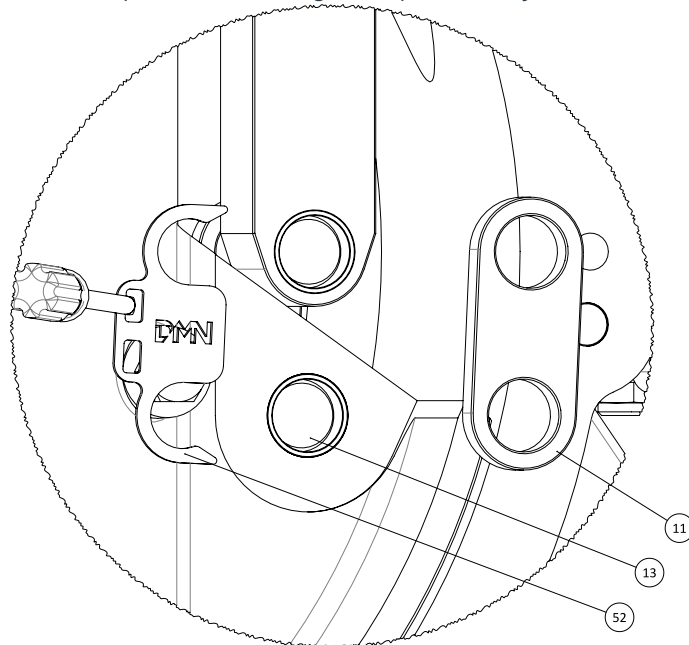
Screwdriver lock plate and link removal (PTD)
